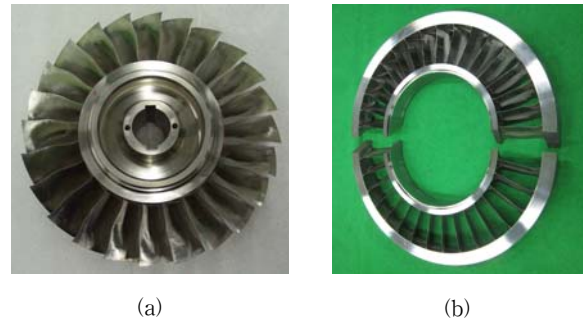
Test pieces of (a) a rotor blisk and (b) a stator bling
